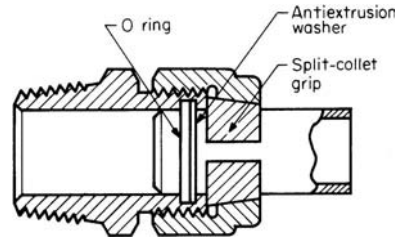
O-ring seal joint. (Courtesy of the Lenz Co.)
